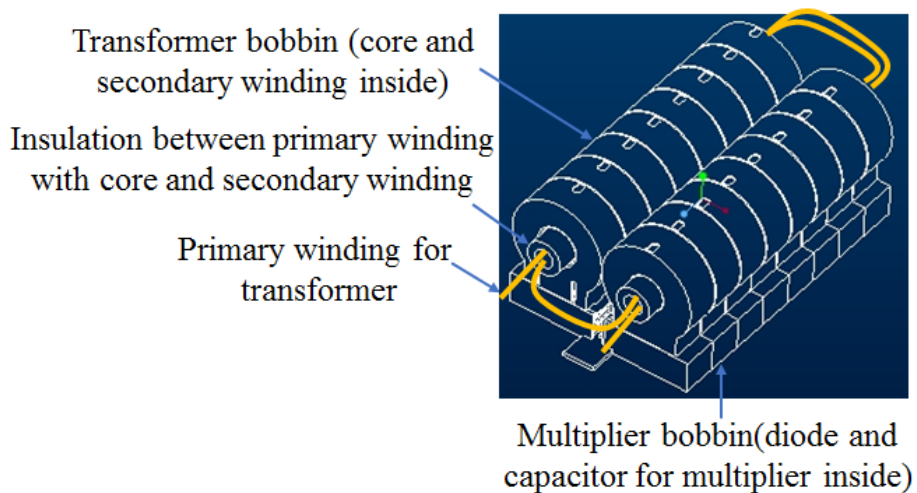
Integrated packaging structure of the modular HV tank with HV wire-wound transformer
